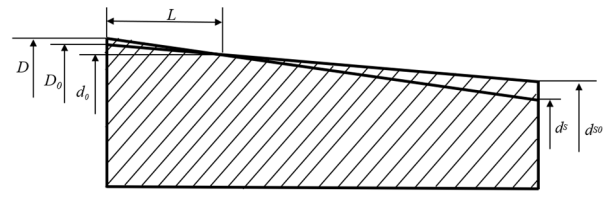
Schematic diagram of the limit tolerance of external thread taper
